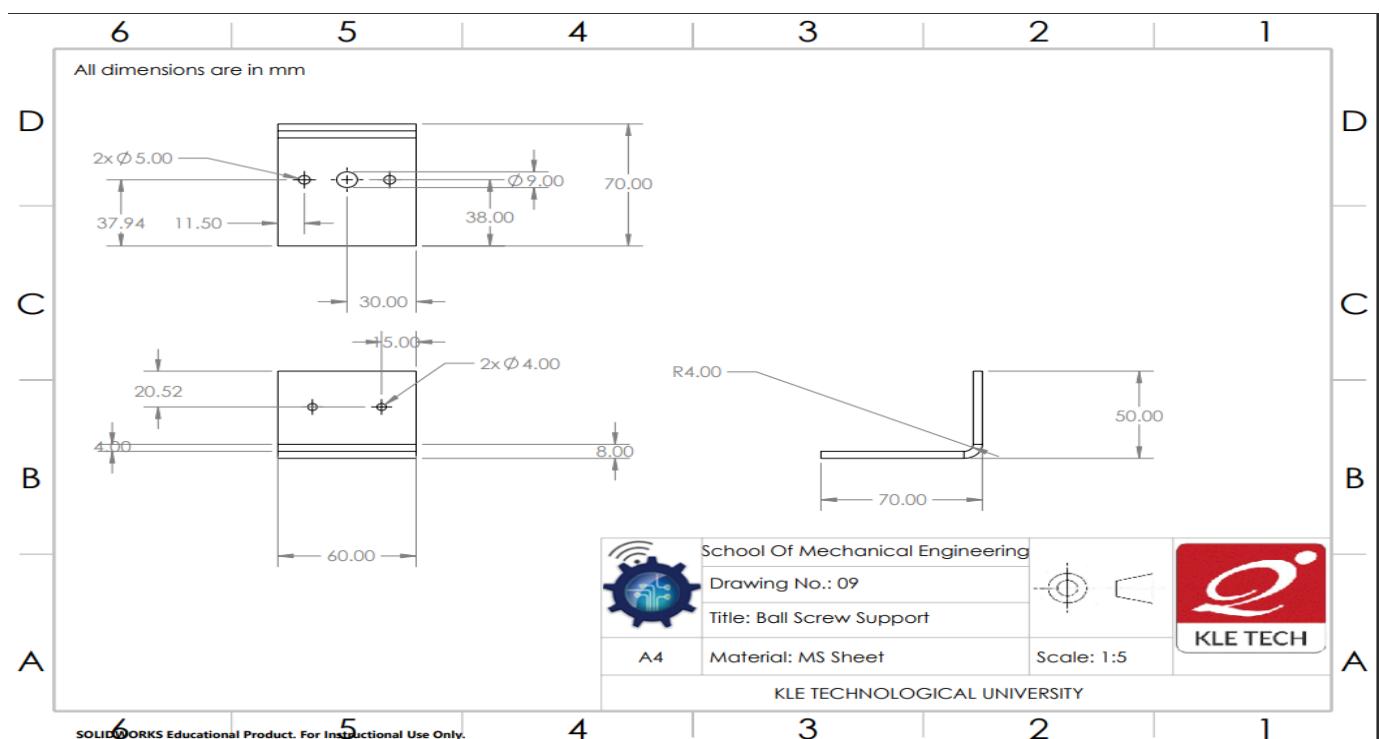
2D Drafting of Ball Screw Support
